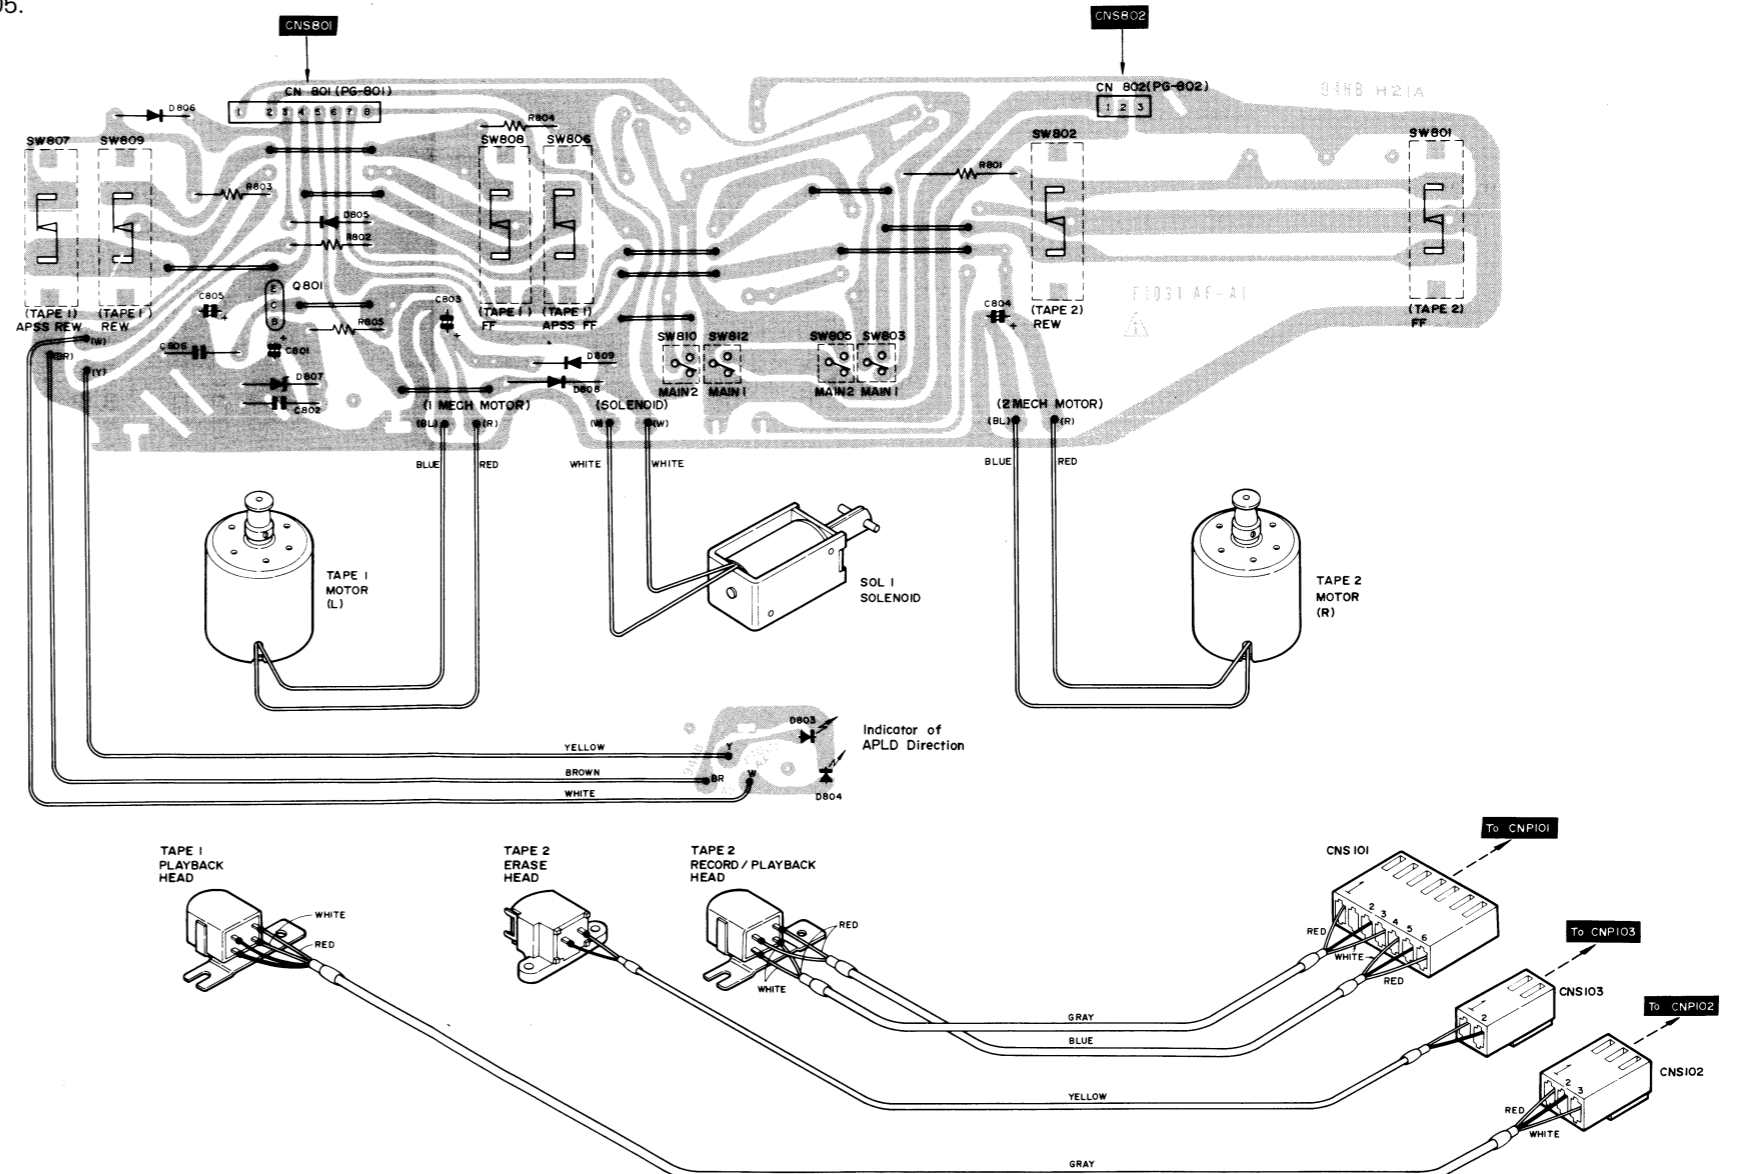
WIRING SIDE OF PRINTED WIRING BOARD (1/4)
